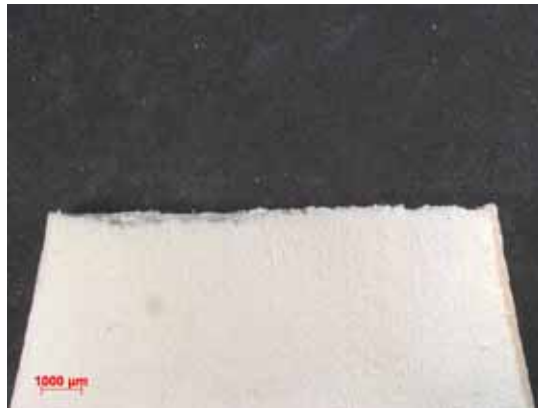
Fracture surface of the N610/LaPO₄/Al₂O₃-LaPO₄ specimen with 10ply 0°/90° uni-tape lay-up subjected tension to failure in laboratory air at 1100 °C.
